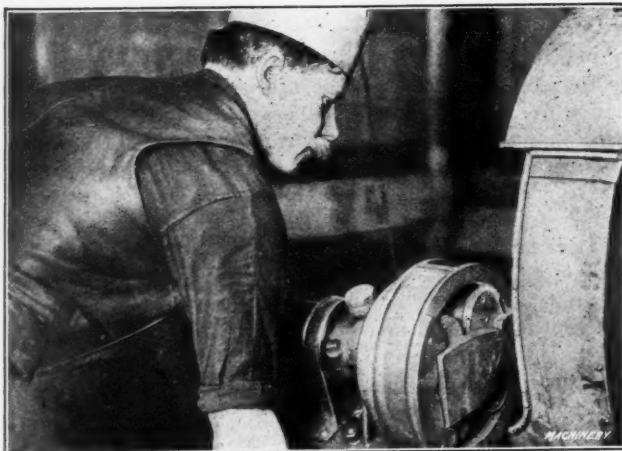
Rotary Magnetic Chuck for Face Grinding Use
